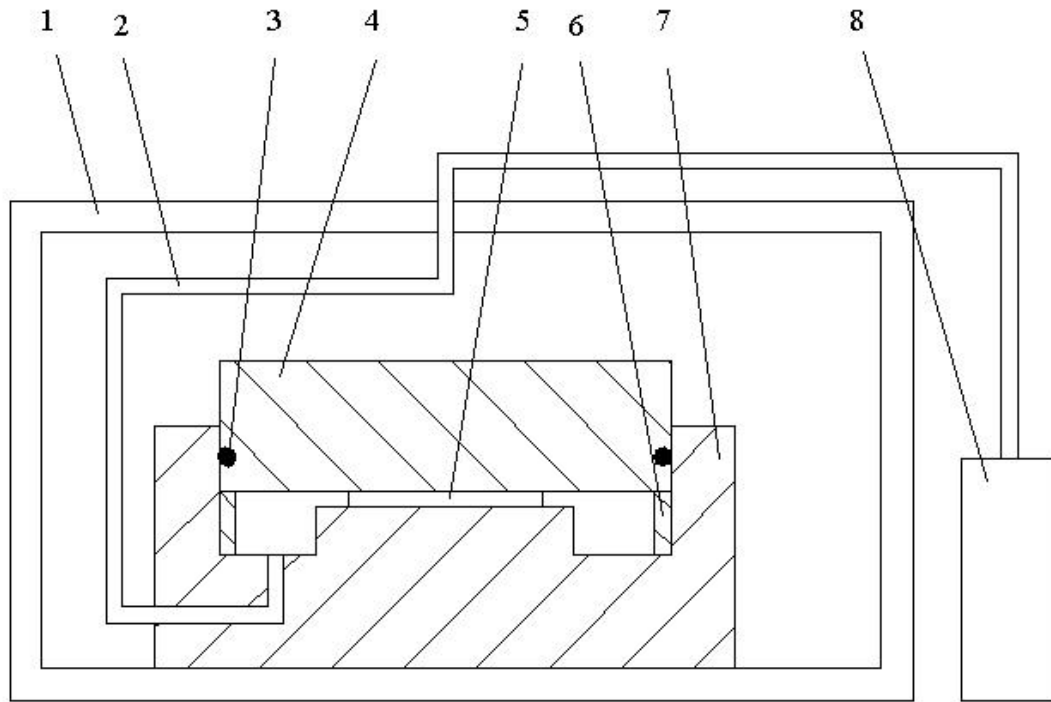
Schematic of the hot press used to prepare the PLA and PLA composites. 1) Vacuum oven, 2) Pipe, 3) O-ring, 4) Piston of mould, 5) Composite (wrapped with aluminium foil), 6) Spacer ring, 7) Housing of mould, 8) Vacuum pump.
